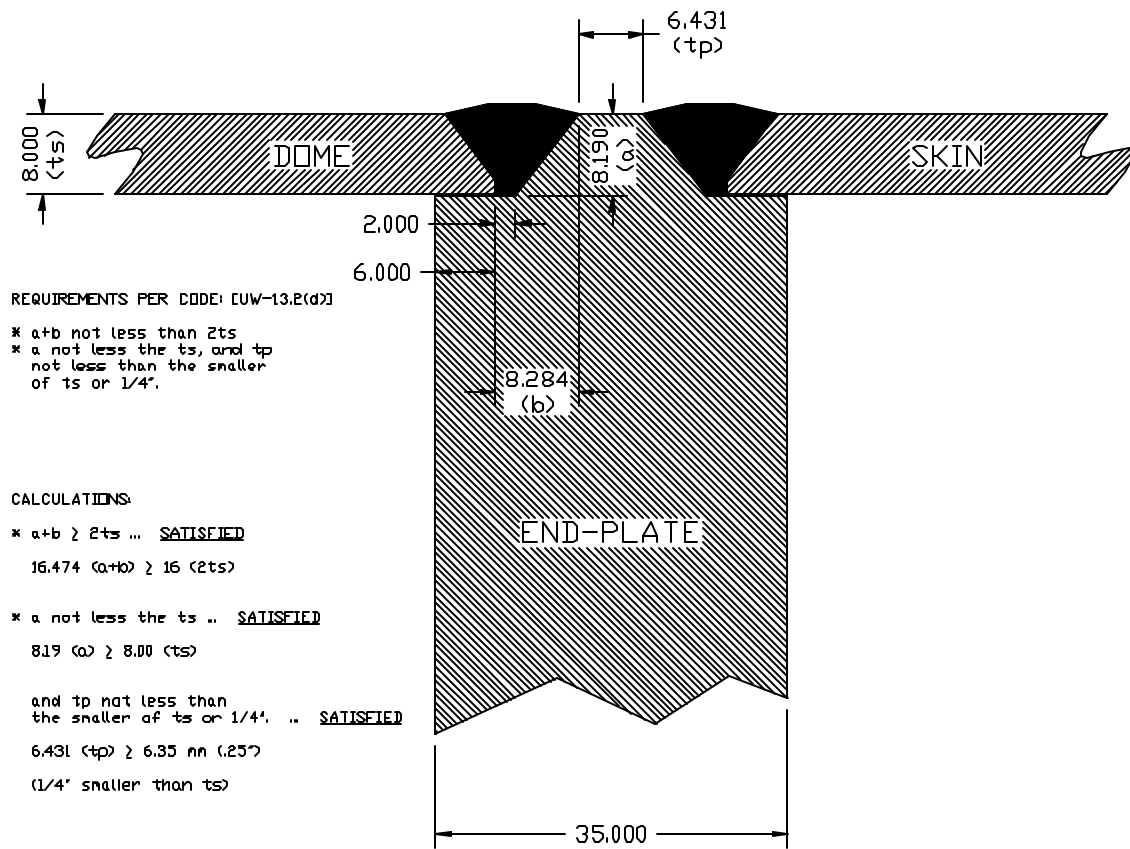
Detail of cold mass skin to end plate weld.
